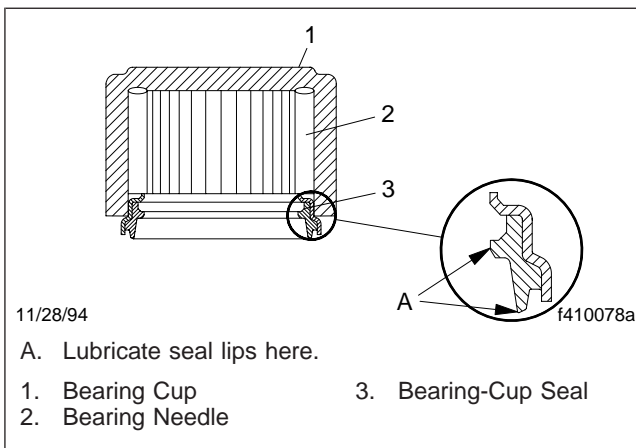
, Sectional View of a Half-Round End-Yoke U-Joint Bearing Cup
